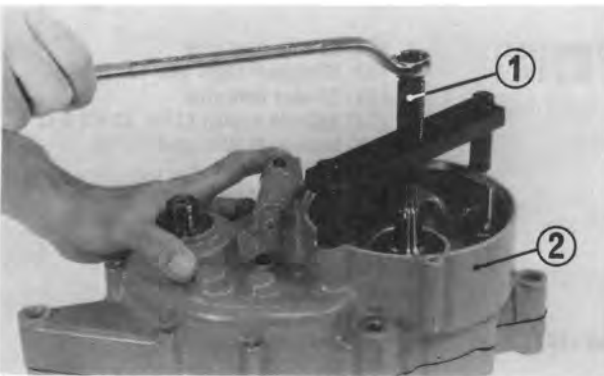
(1) Crankcase disassembly tool (2) Right crankcase
